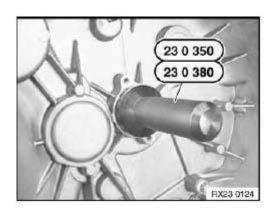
Special Tools (23 0 350) And (23 0 380) Courtesy of BMW OF NORTH AMERICA, INC.
